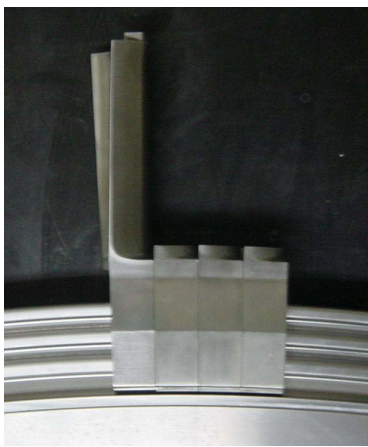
Low pressure turbine blades UT specimen installed in rotor section.
